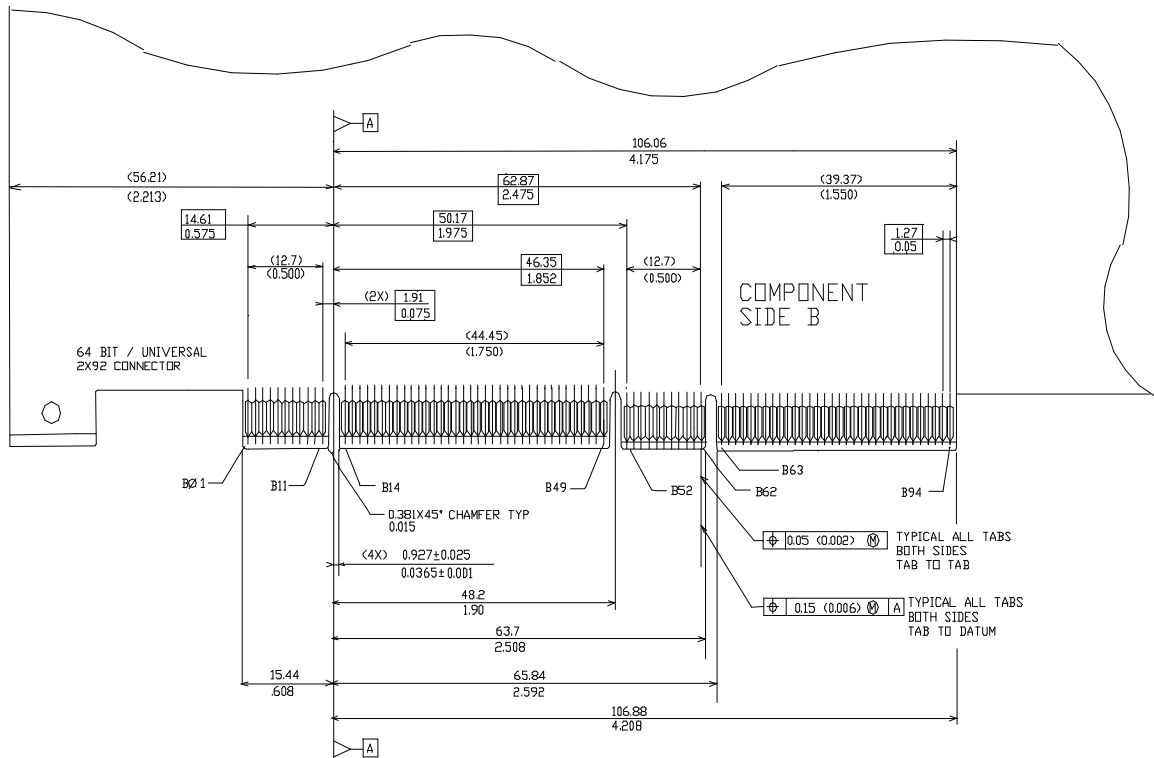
Universal 64-bit Card Edge Connector Dimensions and Tolerances
